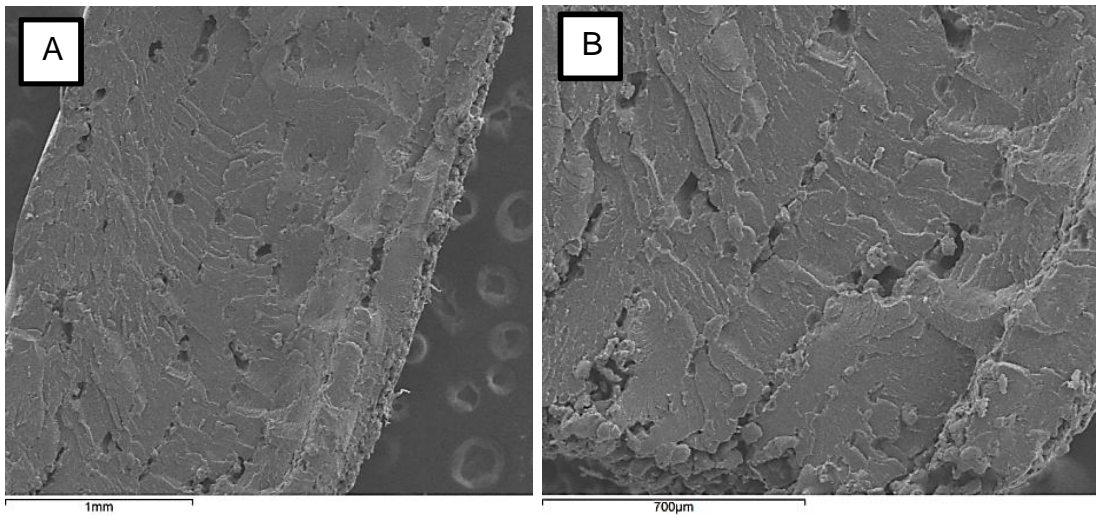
Fracture surface of PEEK ten layer specimen, PS = 12 s, at increasing magnification
